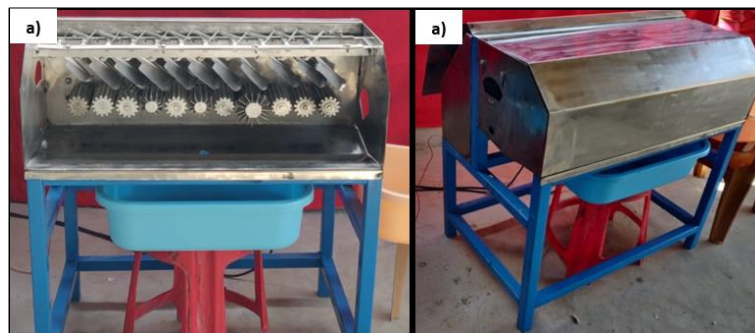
Fish descaling machine a) FDM front view b) FDM with front and back cover
